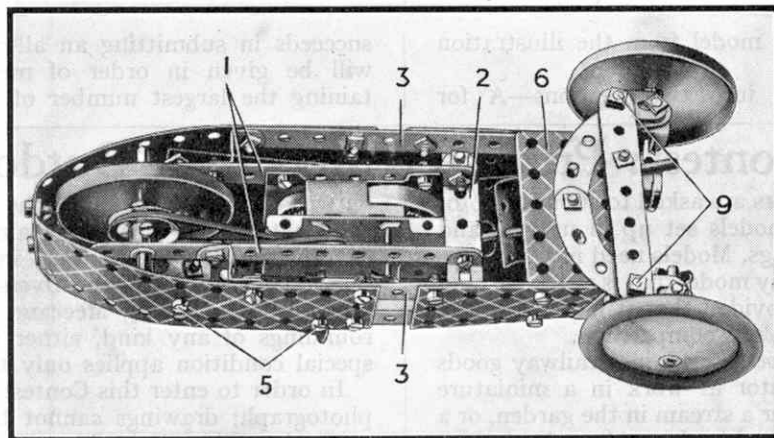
An underneath view of the Outfit C three-wheel sports car, showing how the *Magic Motor* is mounted in the chassis.
